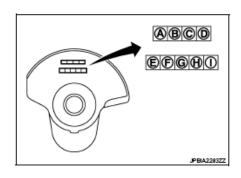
Identifying Bearing Housing Grade Number Courtesy of NISSAN MOTOR CO., U.S.A.
